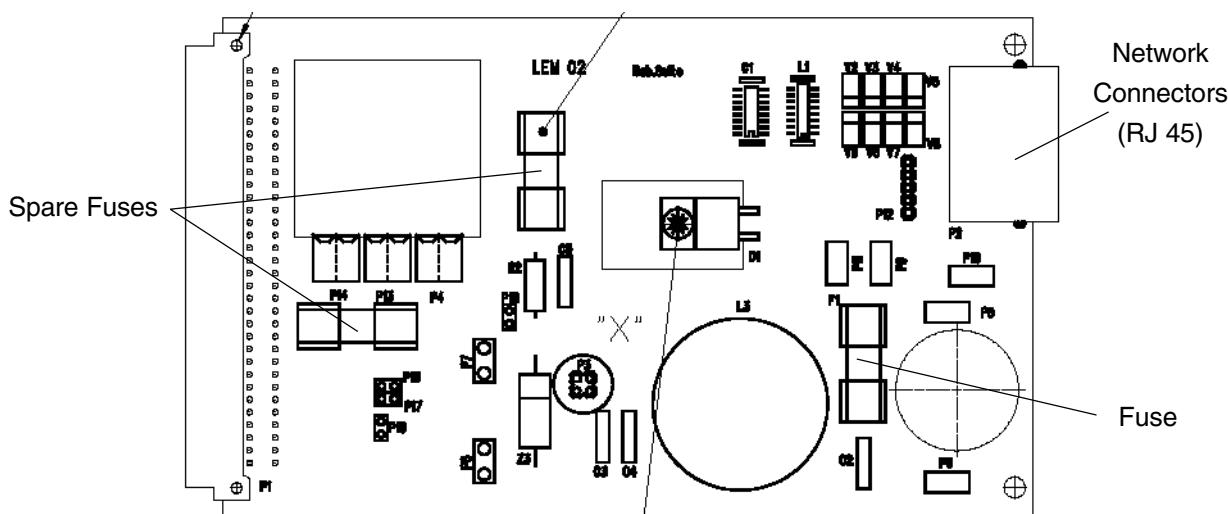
Fuses PCB LEM 02 (component side)
